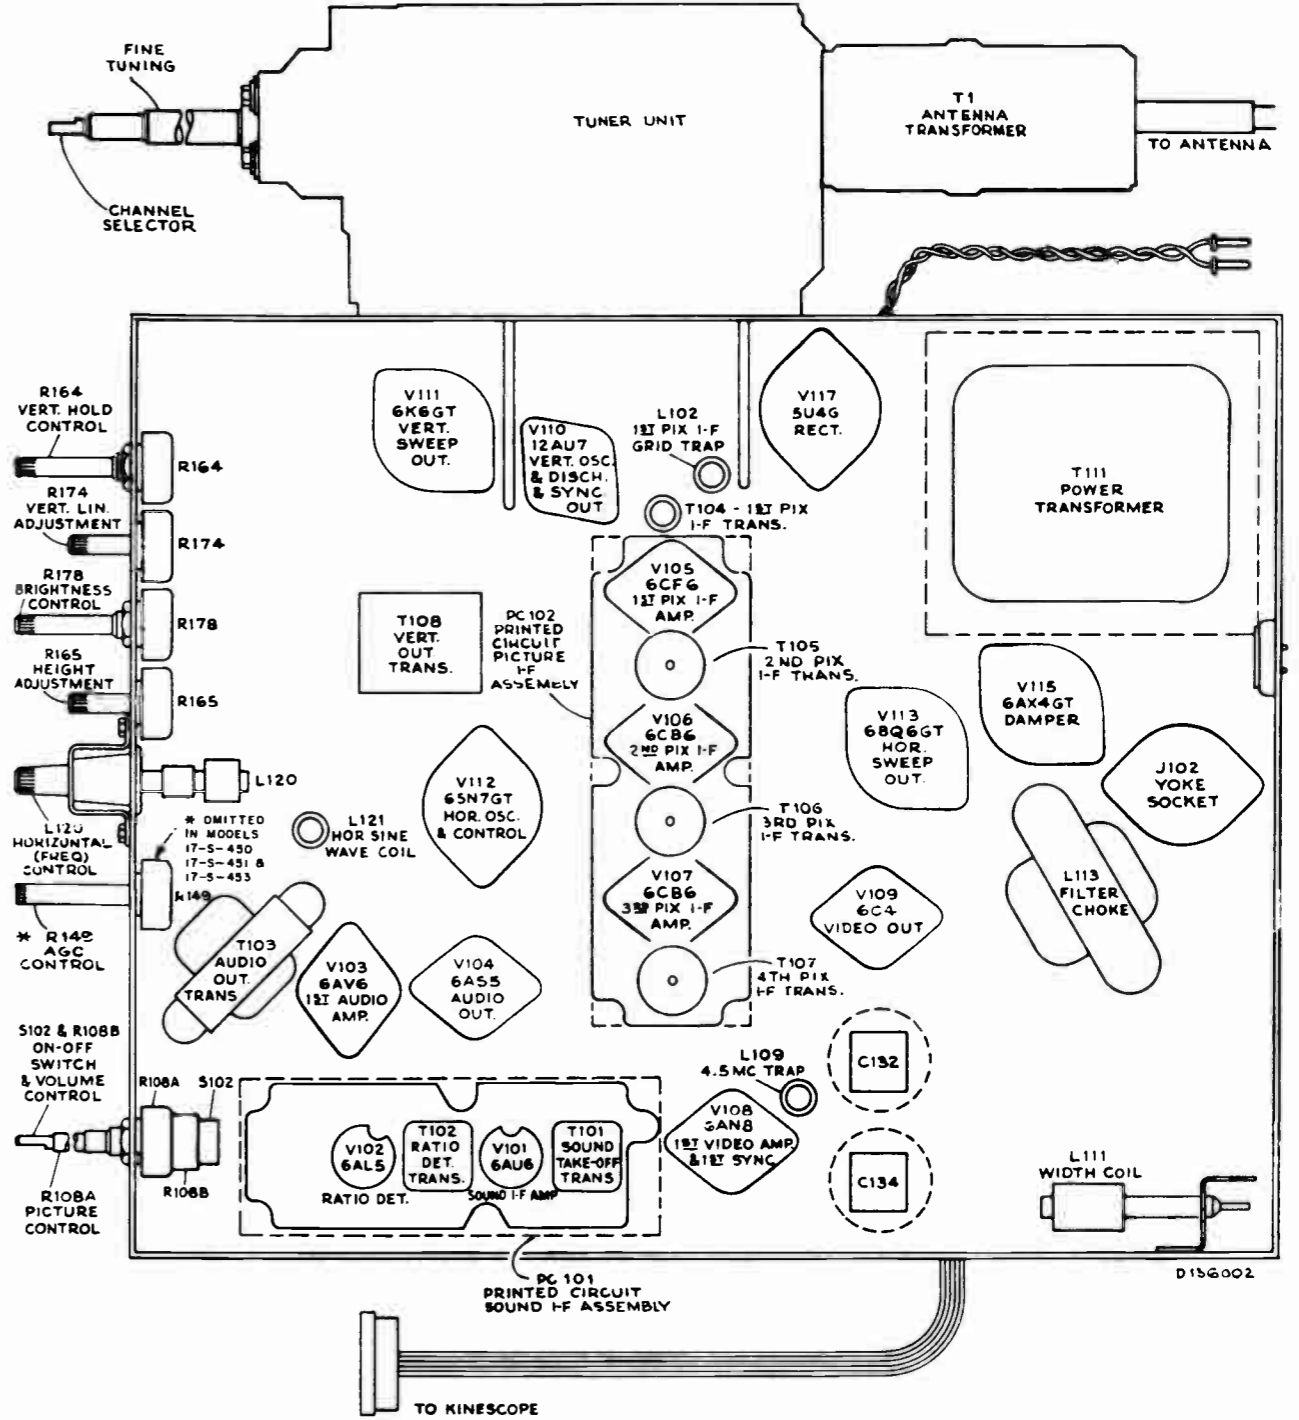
Chassis Bottom View (shown with KRK32 Tuner)
